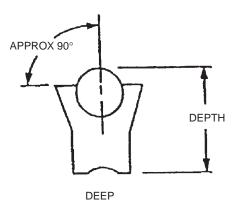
Preformed Packings (Sheet 2 of 5)
